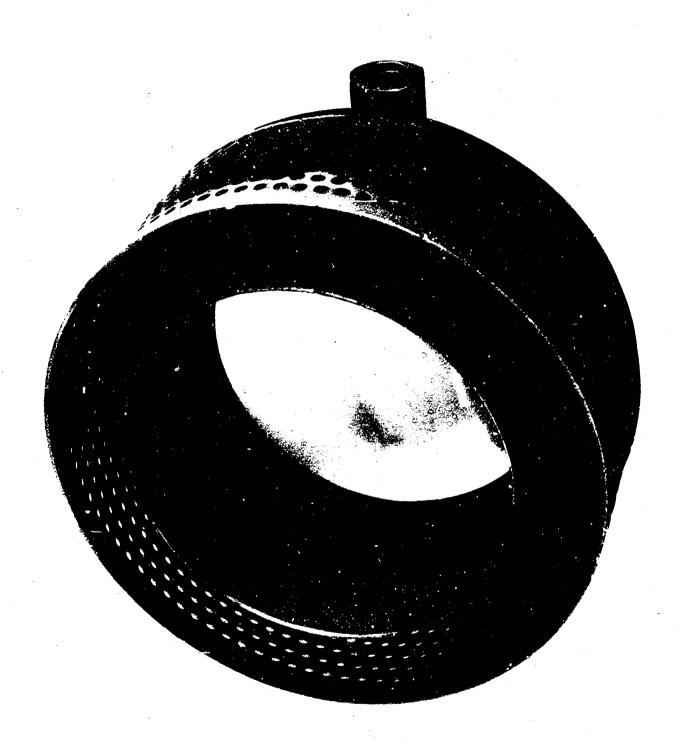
FINAL COMBUSTOR LINER AFTER ENDURANCE RUN
